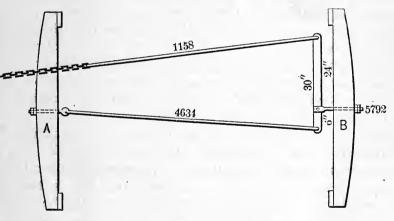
SKETCH OF MECHANISM OF HAND-BRAKE.
